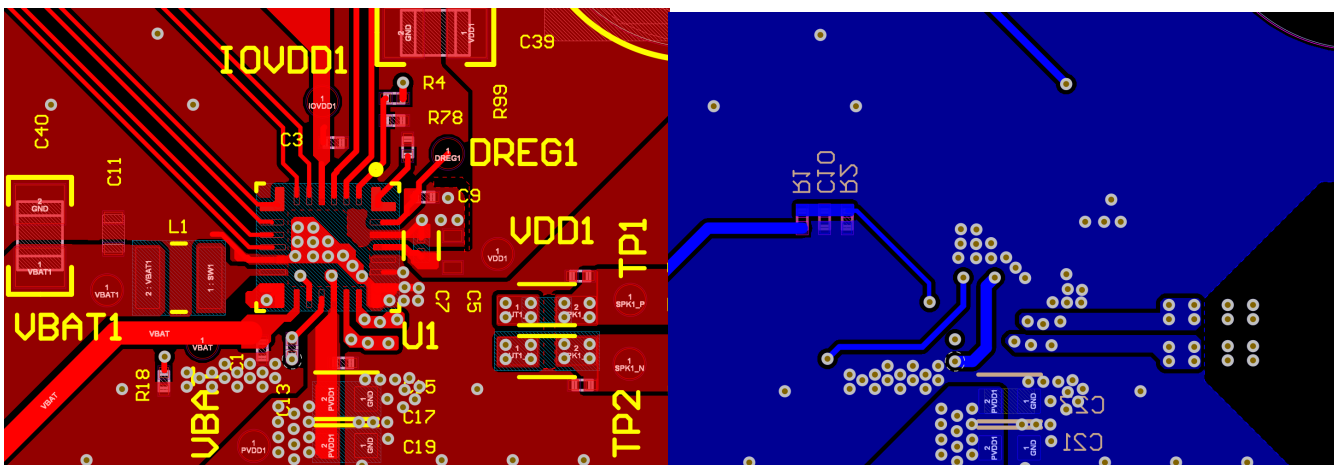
Top (Red) and Bottom (Blue) Layer – Software Control Reference PCB Layout
